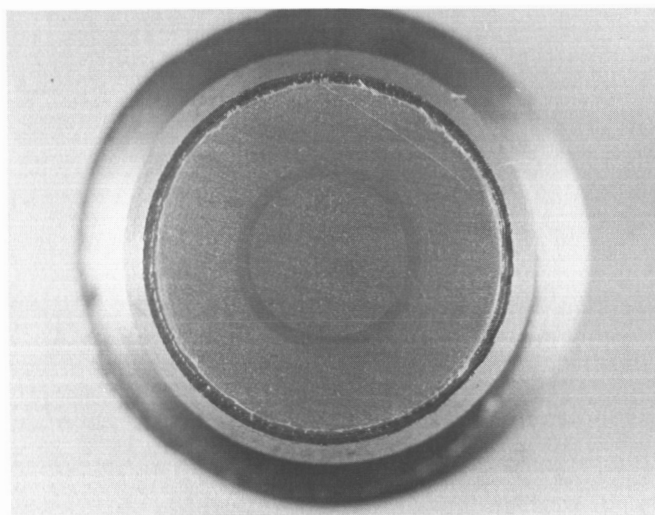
JPL seat 1 used in the SN-2 regulator, shown after testing
